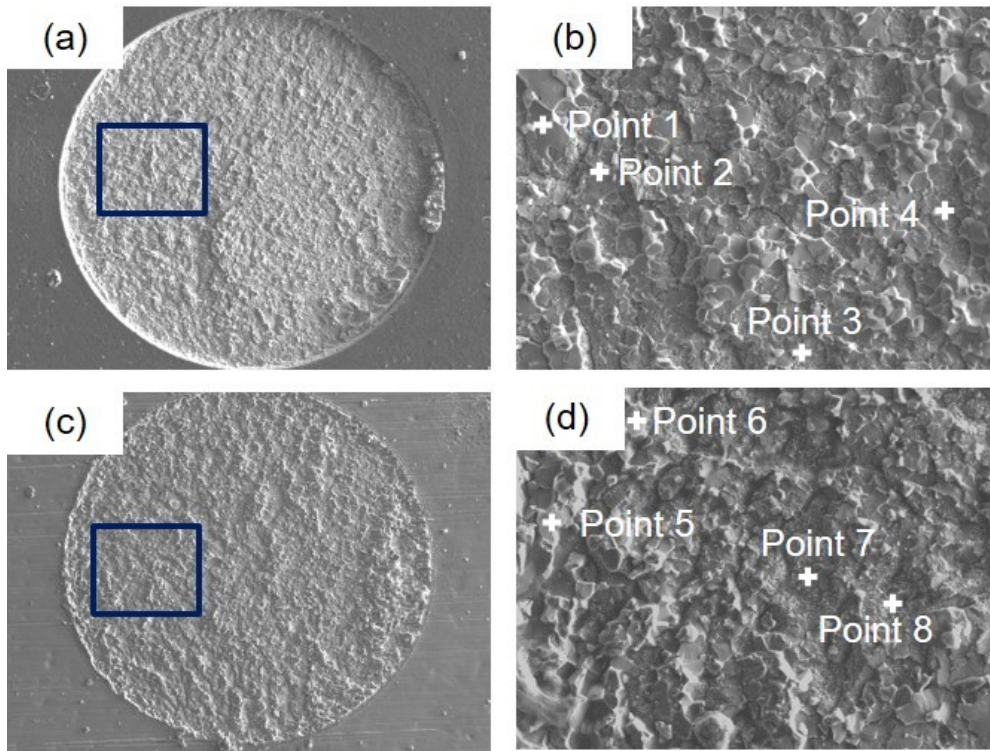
The top view of the impact fracture surfaces for the 1008 h aged solder bumps. (a, b) solder bump under a formic acid atmosphere; (c, d) solder bump using the RMA liquid flux.
